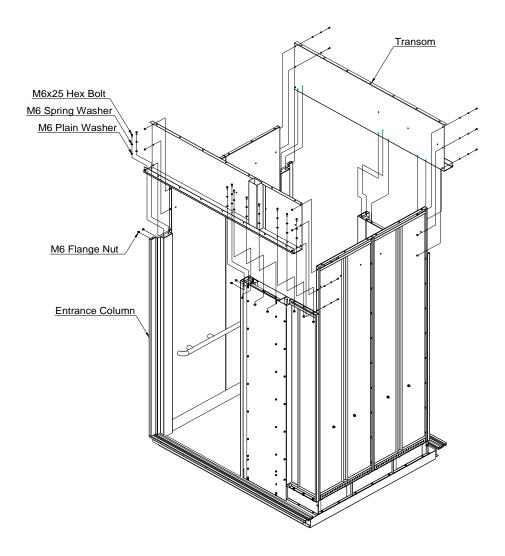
E. TRANSOM ASSEMBLY (FRONT and REAR ENTRANCE)
